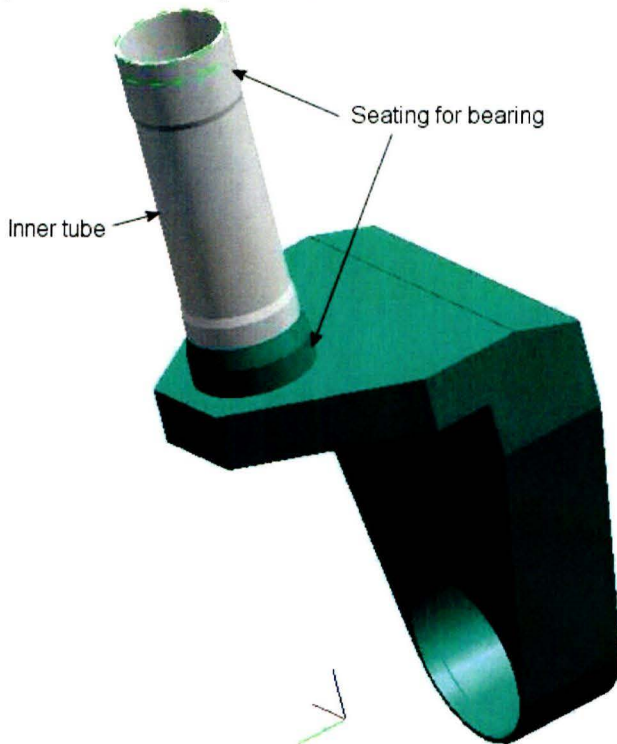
Wheel carrying arm complete with the inner tube welded to the machined cylinder.
